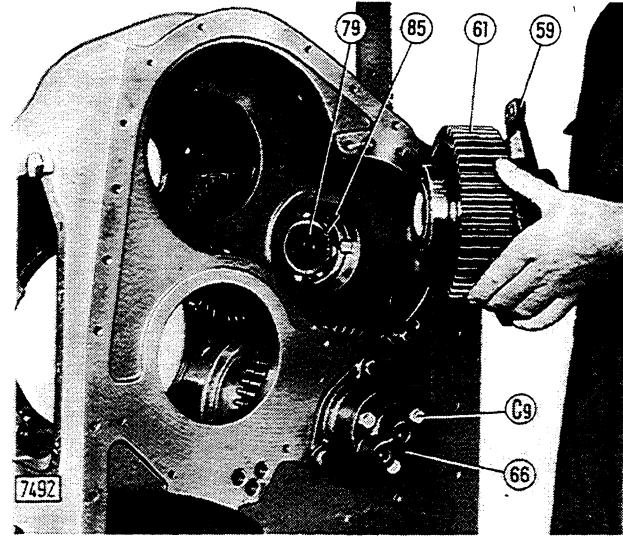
Disassembling bracket (59) with attached drive gear (61).
